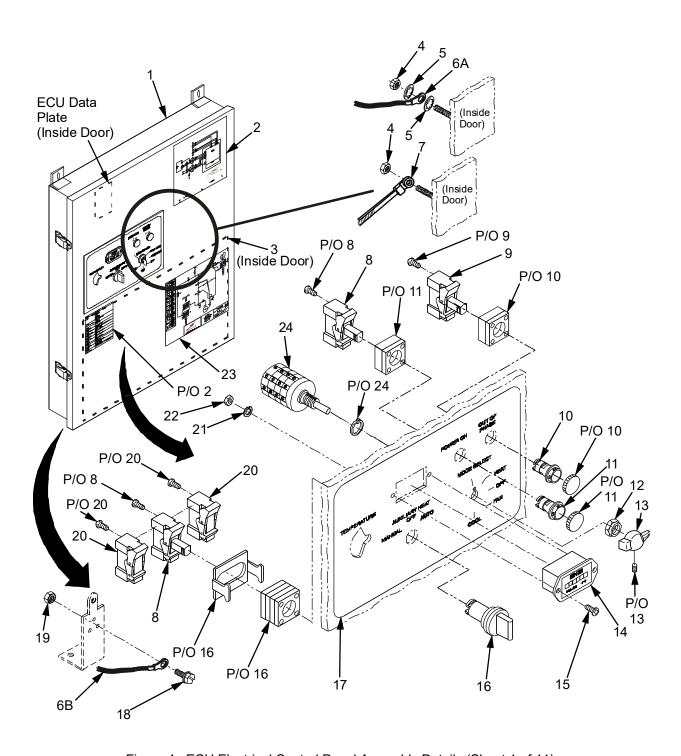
ECU Electrical Control Panel Assembly Details (Sheet 1 of 11).
